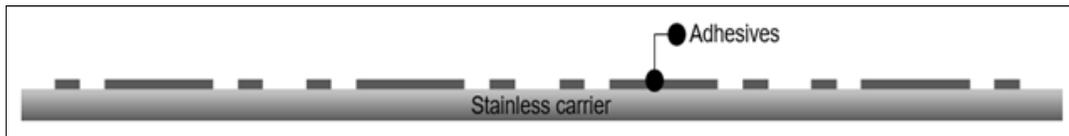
Cross-sectional view of adhesives and stainless carrier
